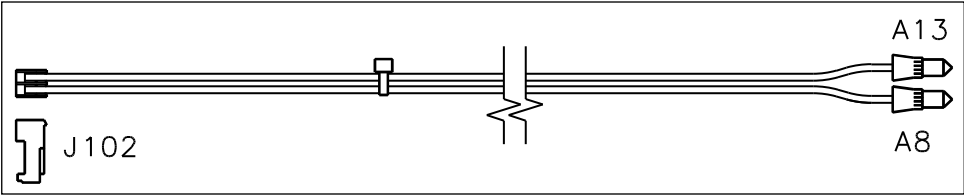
Combo Pump Handle Cable (M02385A001)
